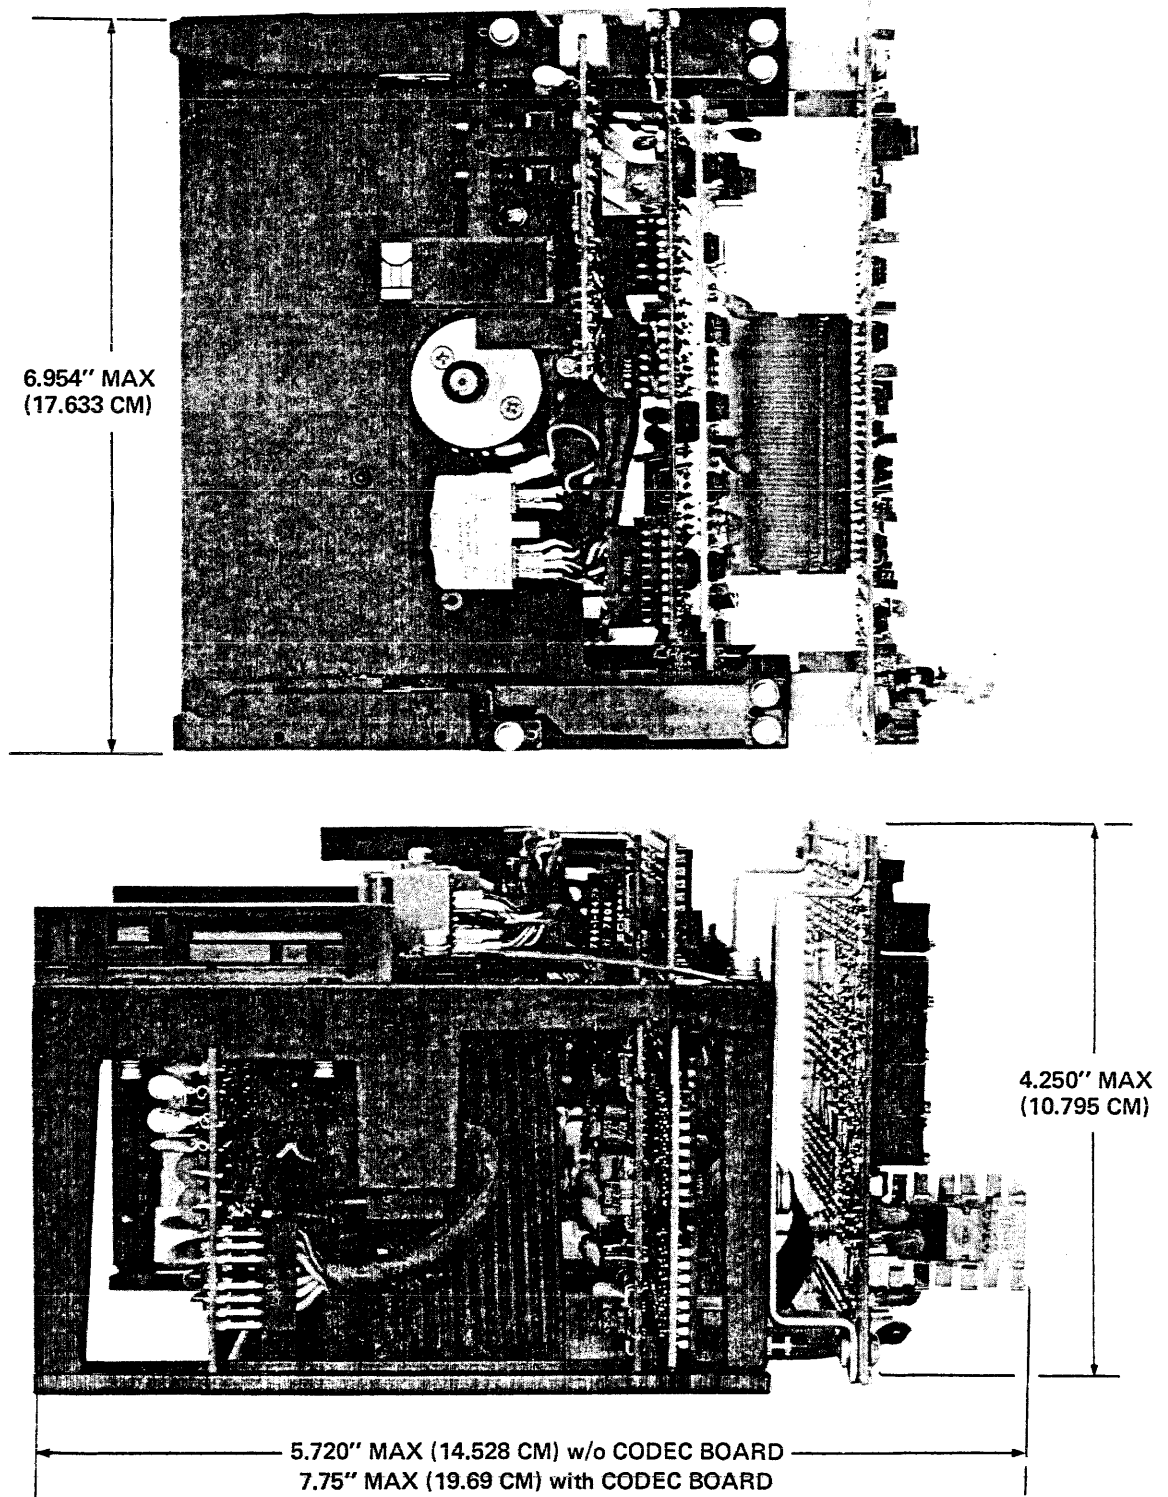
OVERALL DRIVE DIMENSIONS
